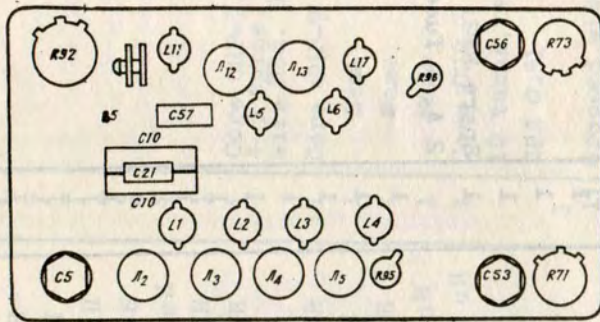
UPPER CHASSIS (BOTTOM VIEW)
